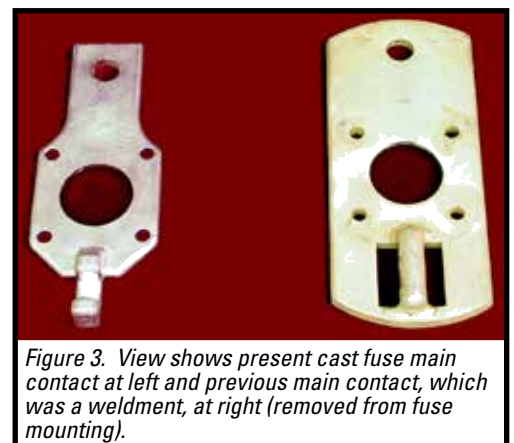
View shows present cast fuse main contact at left and previous main contact, which was a weldment, at right (removed from fuse mounting).
